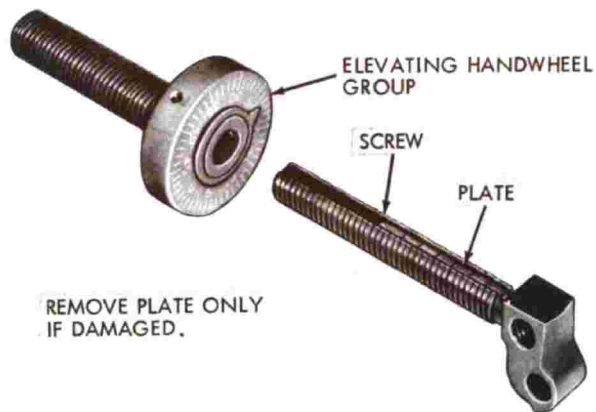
Disassembly/assembly of upper elevating screw stop, using screw stop tool.
